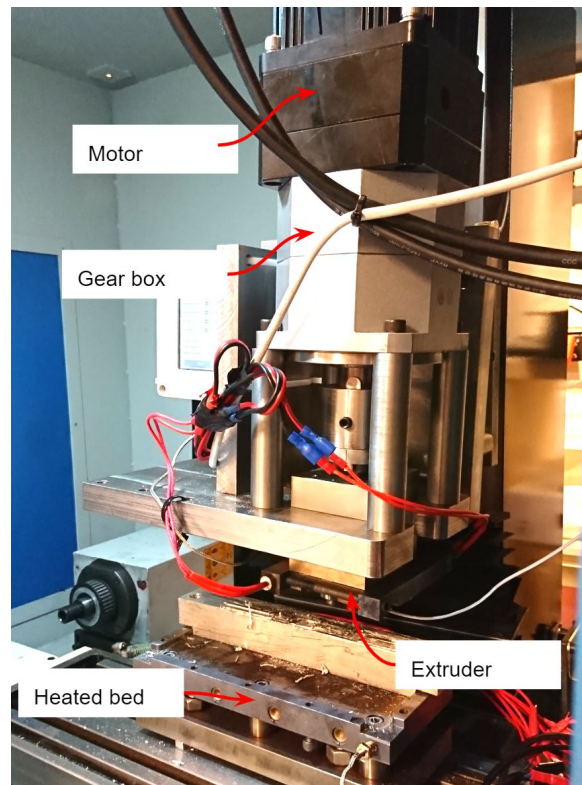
The extruder assembly attached to the CNC machine. A heated bed is used to control the temperature of the deposited structure.
